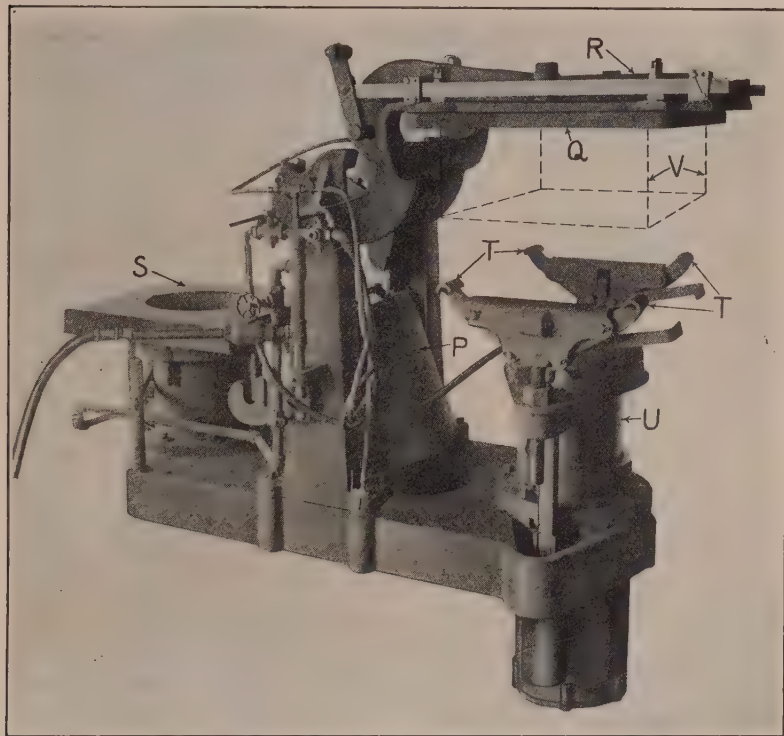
International's Swing-Arm Jolt-Ramming Turn-Over Pattern-Draw Molding Machine.
